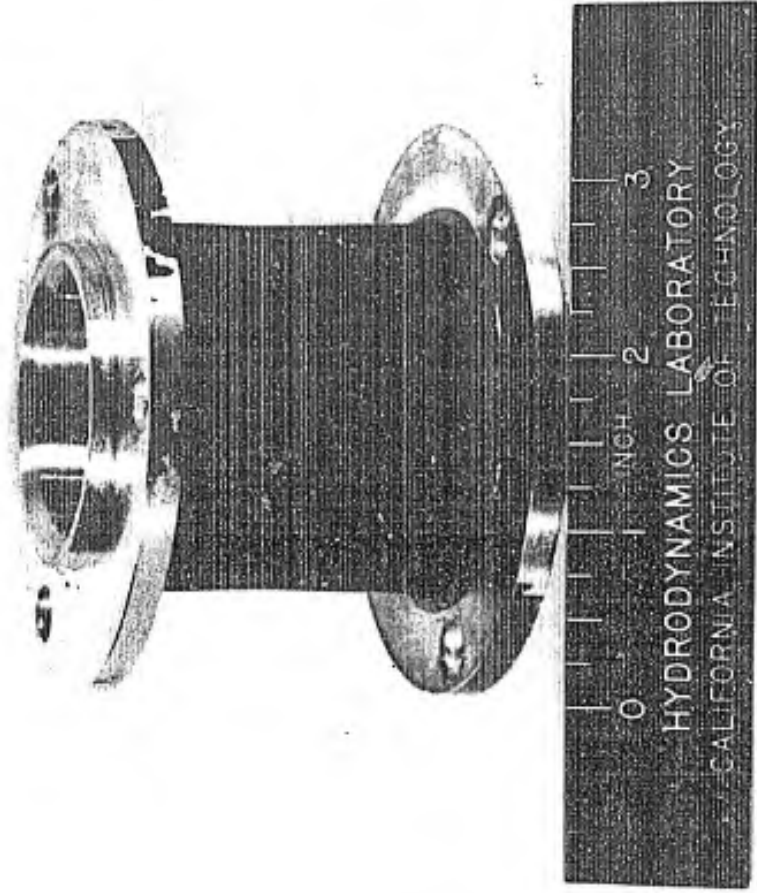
SPECIMEN FAILURE (SHEAR TEST)
